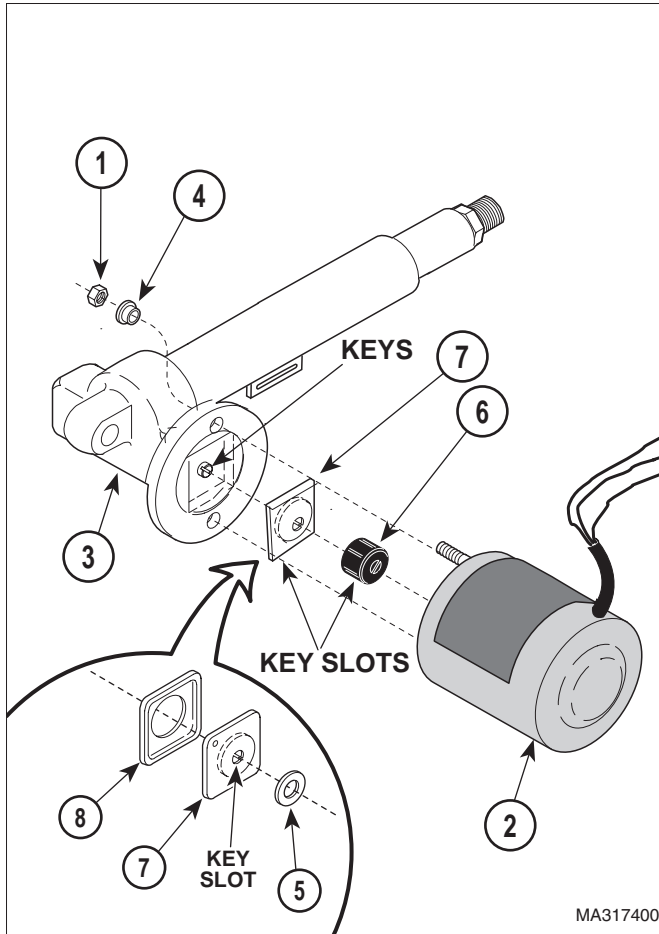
Typical Actuator Motor / Actuator Brake Removal / Installation
